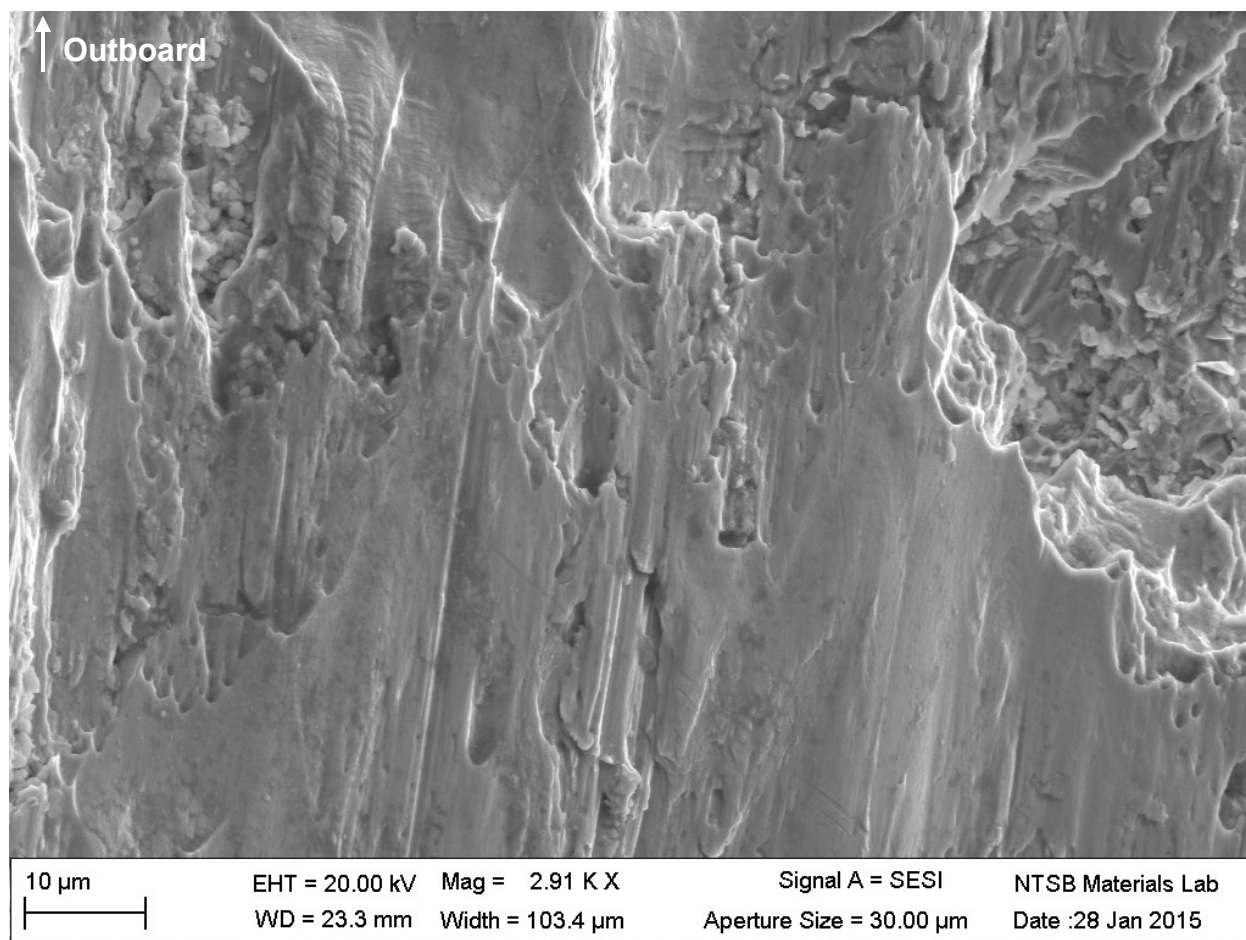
SE micrograph of the hole-shaped region of the case fracture, showing smearing and elongated dimple rupture.
